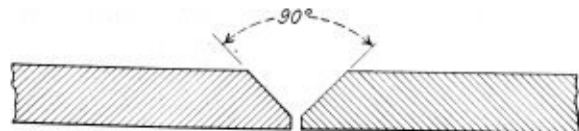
Bevel specifications for plate over 3/16 inch thick
